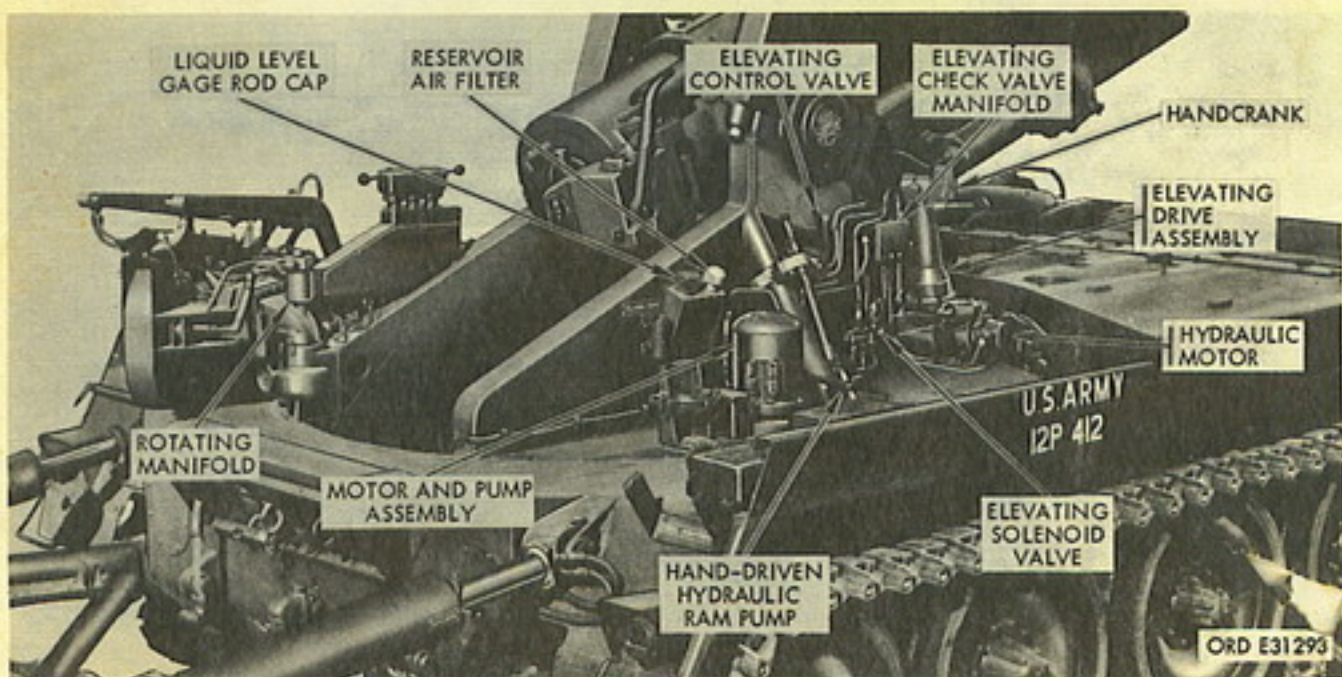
TURRET - RIGHT REAR VIEW (TURRET INSTALLED).
